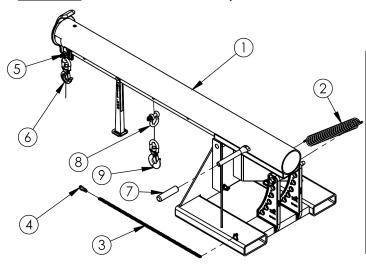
E: LM-OBNT-4k Exploded Parts Diagram & Bill of Materials
